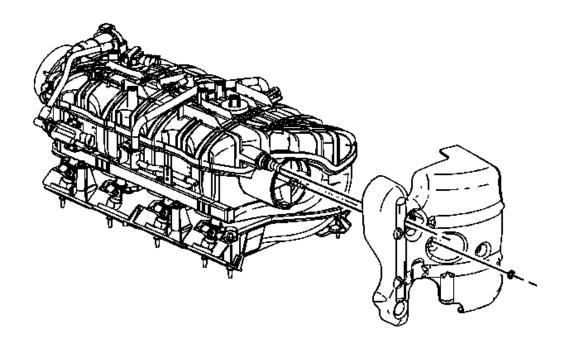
View Of Upper Intake Manifold Cover & Nut Courtesy of GENERAL MOTORS CORP.
